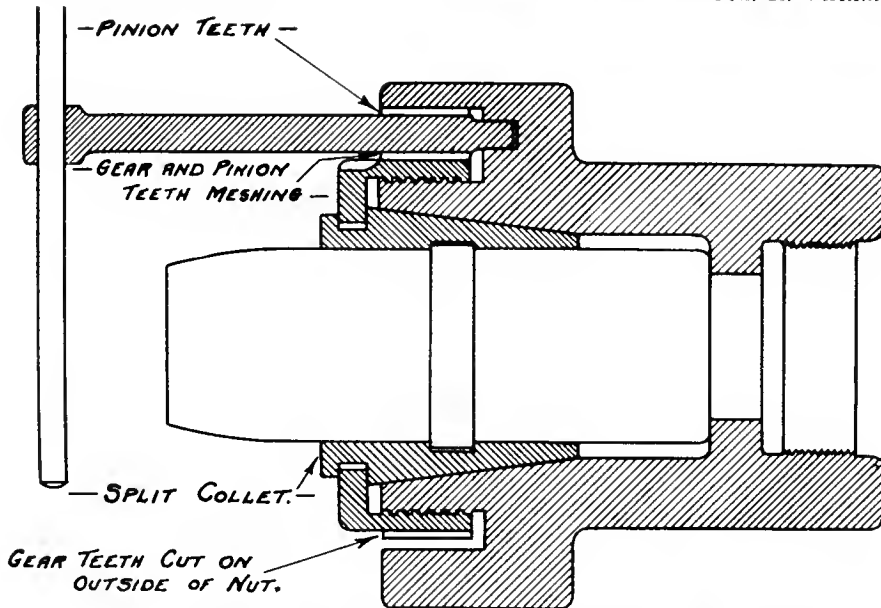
SPECIAL COLLET CHUCK USED IN FINISHING SOCKETS.
